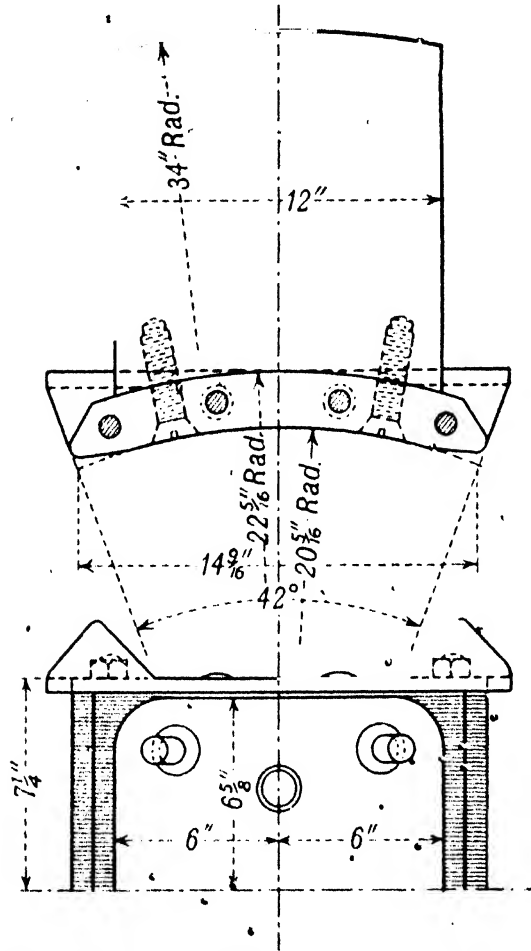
Magnet core and laminated pole-shoe for large machine.
